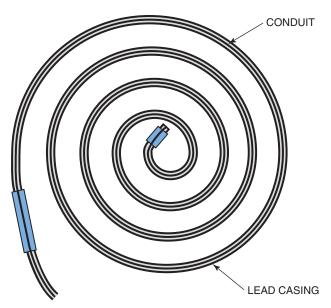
Tightly coiled lead casing will force the liner out of the gun.
